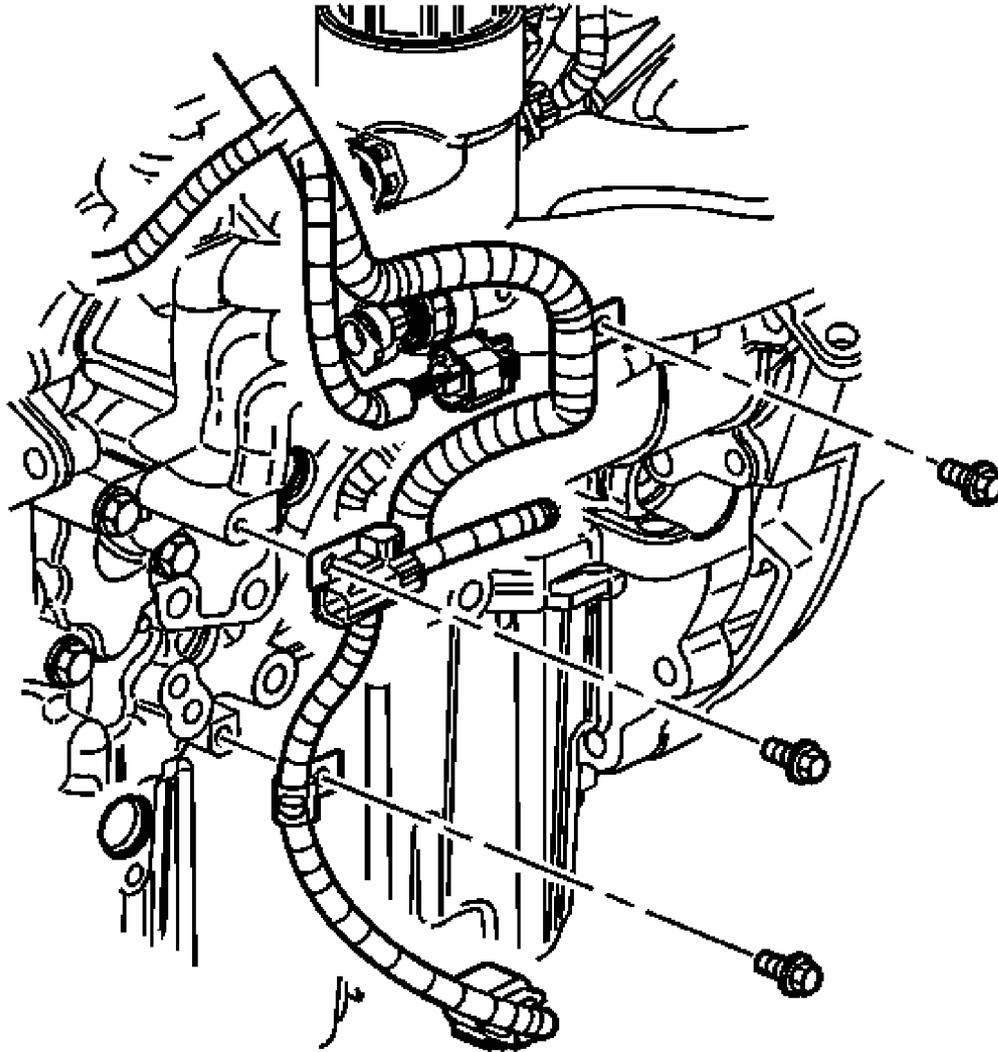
View Of Left Camshaft Cover Wiring Harness Connector - Front
